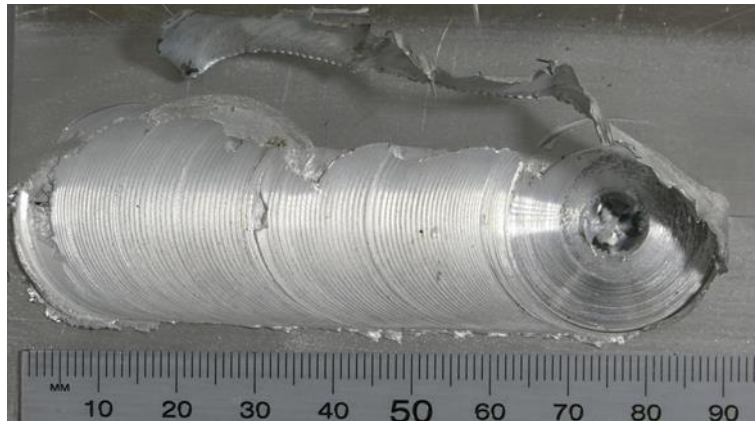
Surface of the weld bead (Courtesy of TWI,Ltd).
